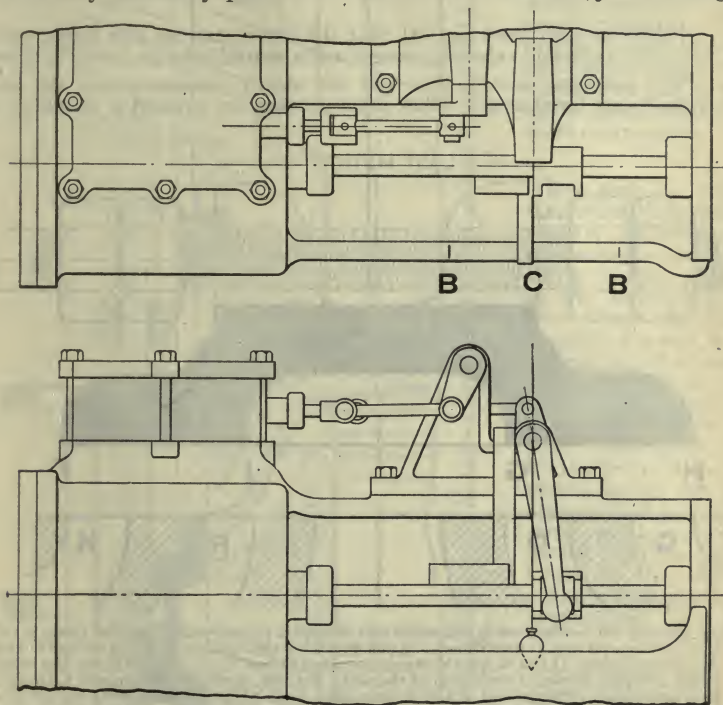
and 757.—Valve gear of the *Smith-Vaile* pump. The main valve A, is a slide and is moved by a valve piston D. The supplemental valve F, has a reciprocating rotary motion which is communicated to it by the rock arm G, and pitman H, connecting with the cross head I, secured to the piston rod. It will be observed that the piston rod J, and the rod K, of the water end are separated so that should either one give out through wear or accident it can be replaced without sacrificing both, as would be the case if they were solid in one piece. This supplemental valve F, in general appearance very closely resembles the "Corliss" valve, and its action is somewhat similar, in controlling the action of the valve piston, which will be understood from the cut without further description.
